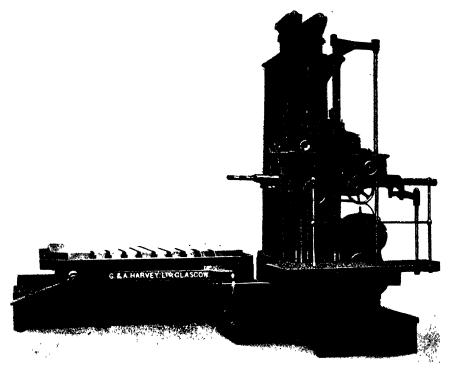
Three-and-a-half-inch spindle horizontal drilling machine with sliding table (G. & A. Harvey, Ltd.)
